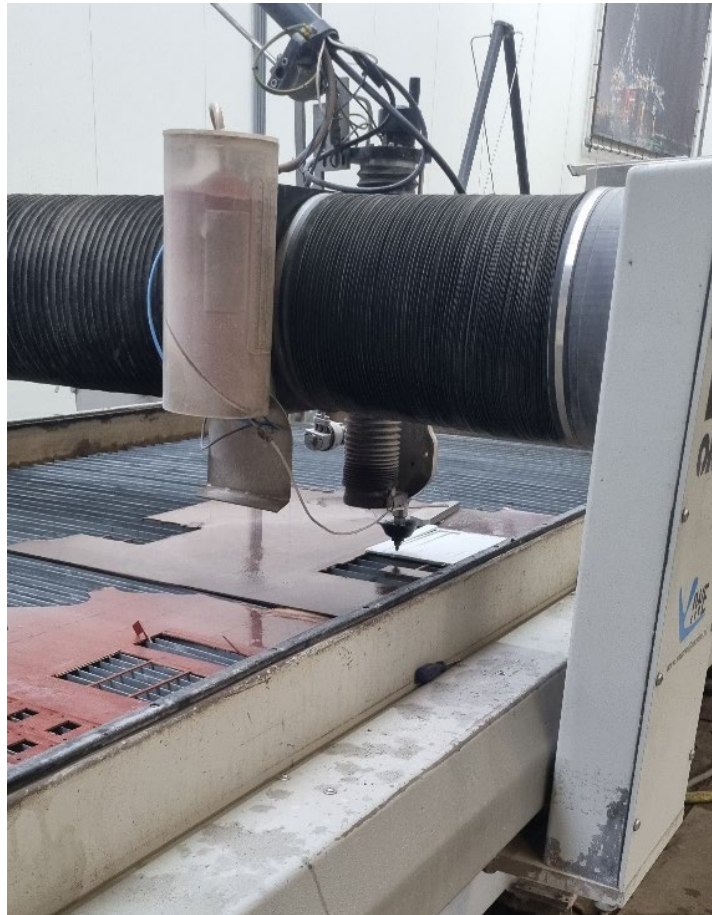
Water jetting machine cutting coupons from one of the sides of a box
